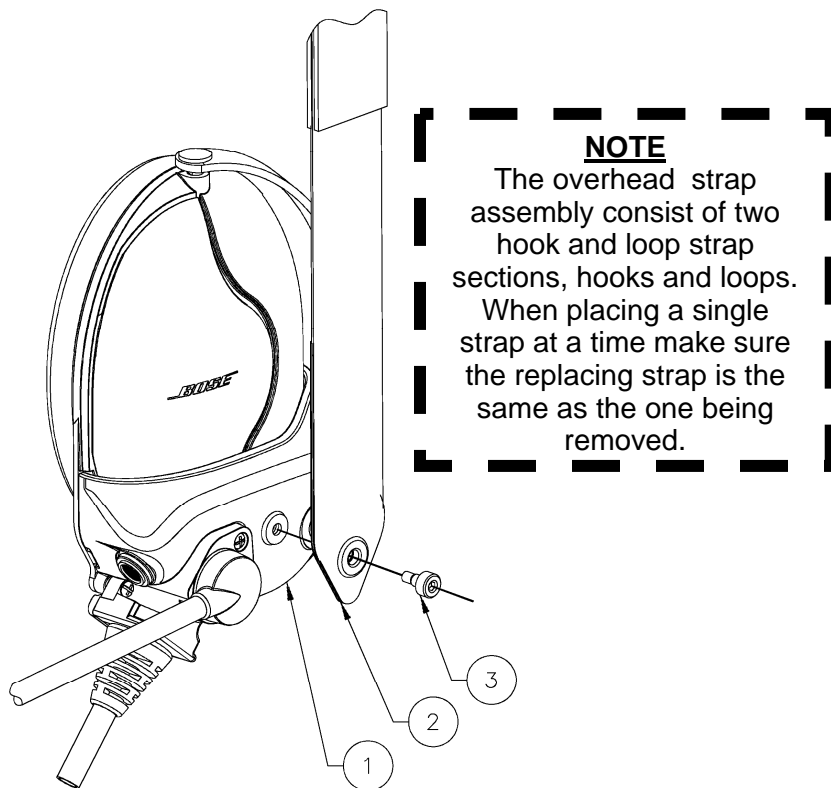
Overhead Strap Assembly Removal and Replacement
